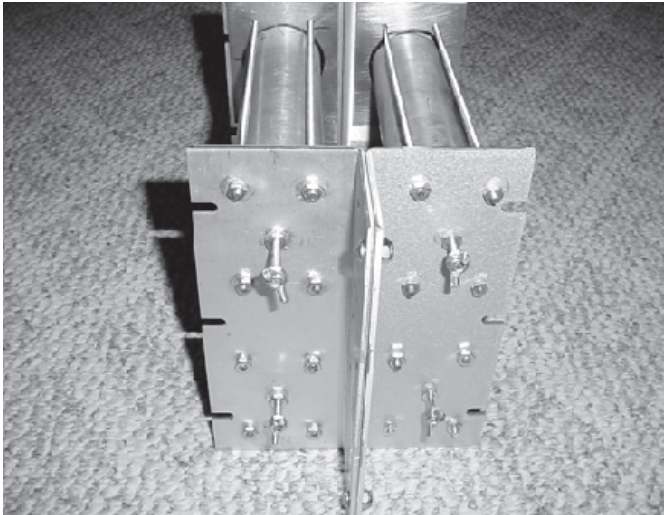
Photo G — This end view of the completed pair of cavities shows the bandpass tuning adjustment all thread rods through the angle brackets.
